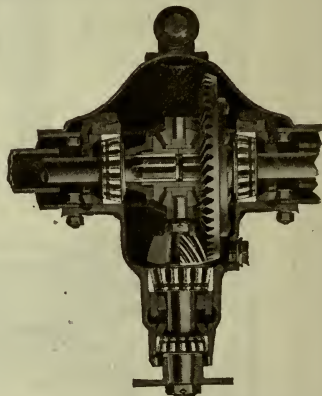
Timken Bevel Gear Mounting in the Rear Axle.
